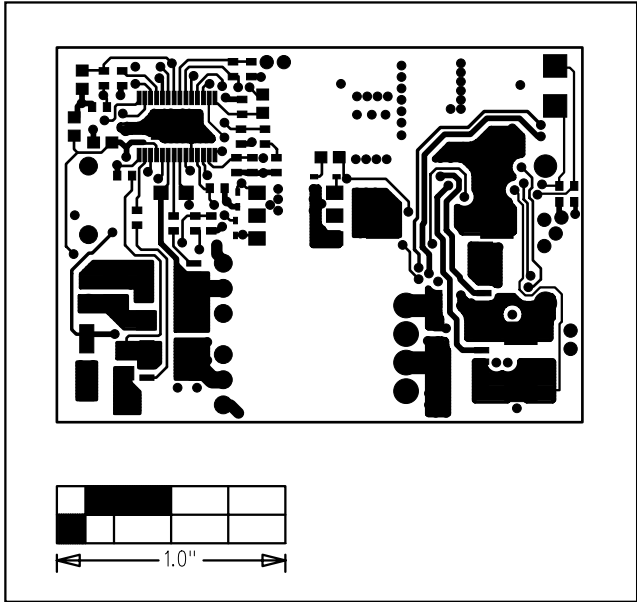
MAX5058 EV Kit PC Board Layout—Component Side
